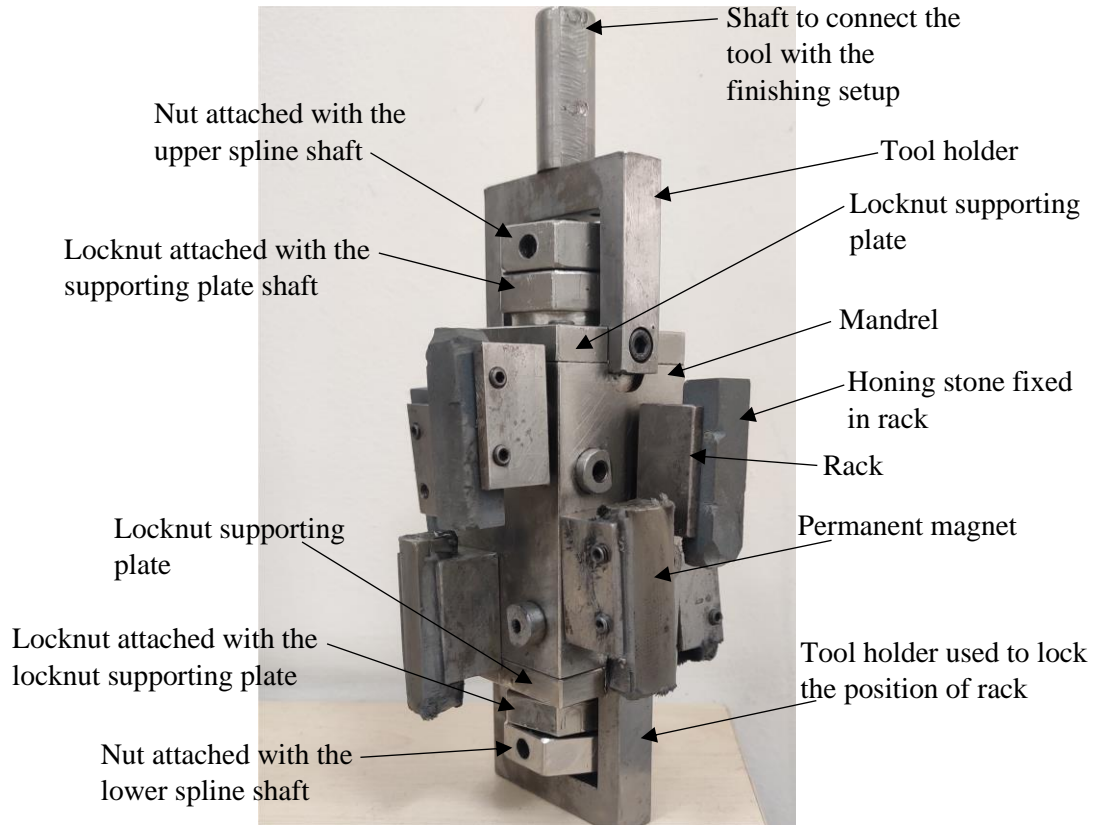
Photograph of the fabricated in-situ magnetorheological (MR) honing tool.
